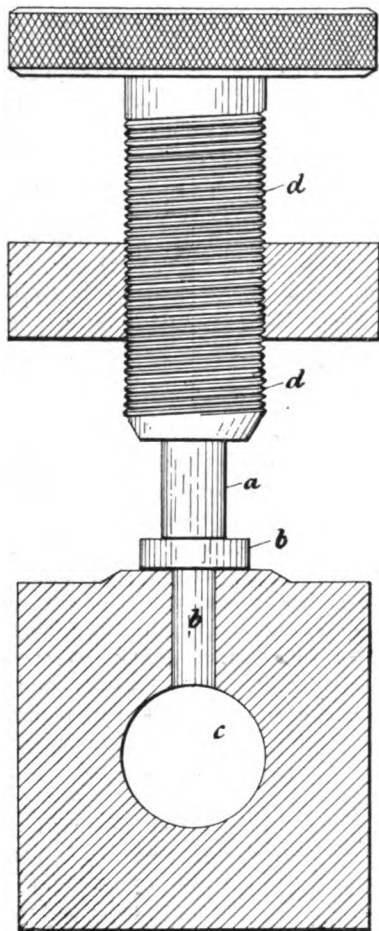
PRESSURE GAUGE FOR SHOT GUNS.
